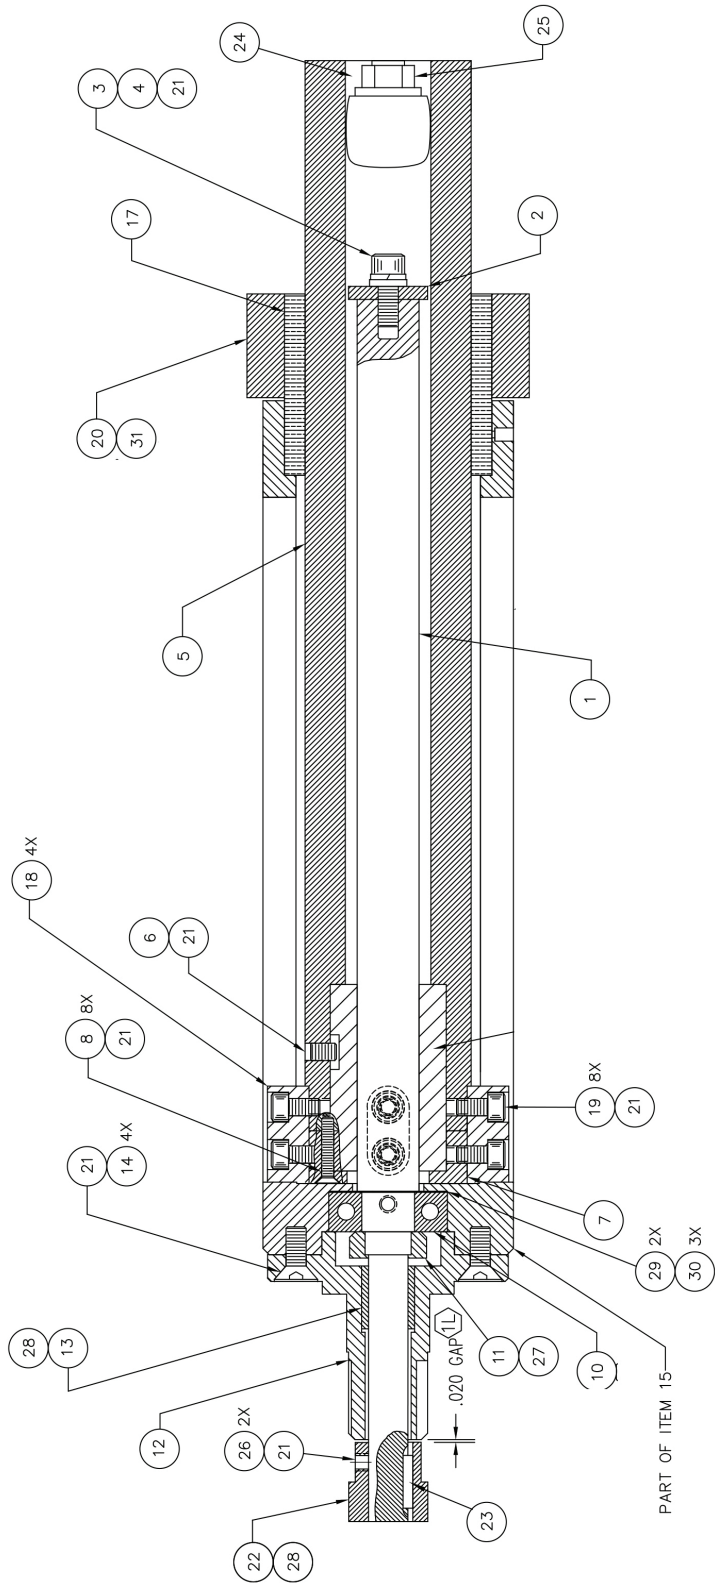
B. BALLSCREW CYLINDER ASSEMBLY KC310
